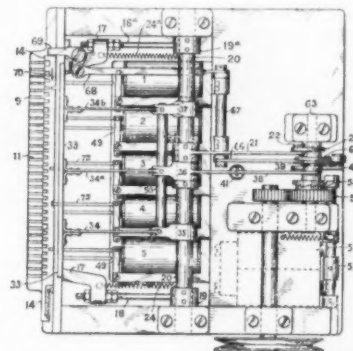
Murray Multiplex Printer—Plan View With Typewriter Removed.
